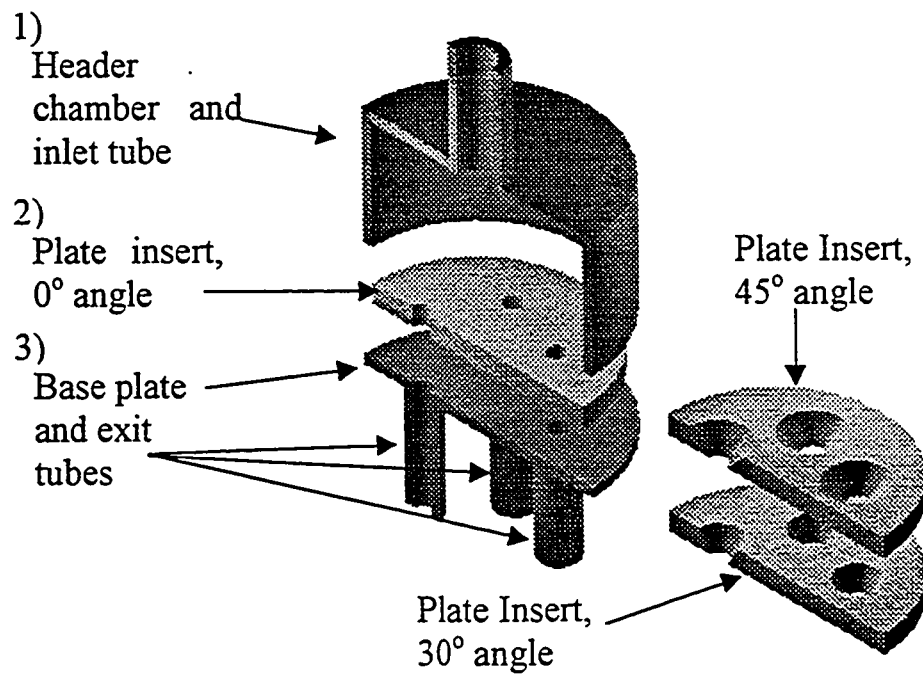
Section of the model header and plate inserts for the ¼ in. (0.00635 m) ID tubes.
